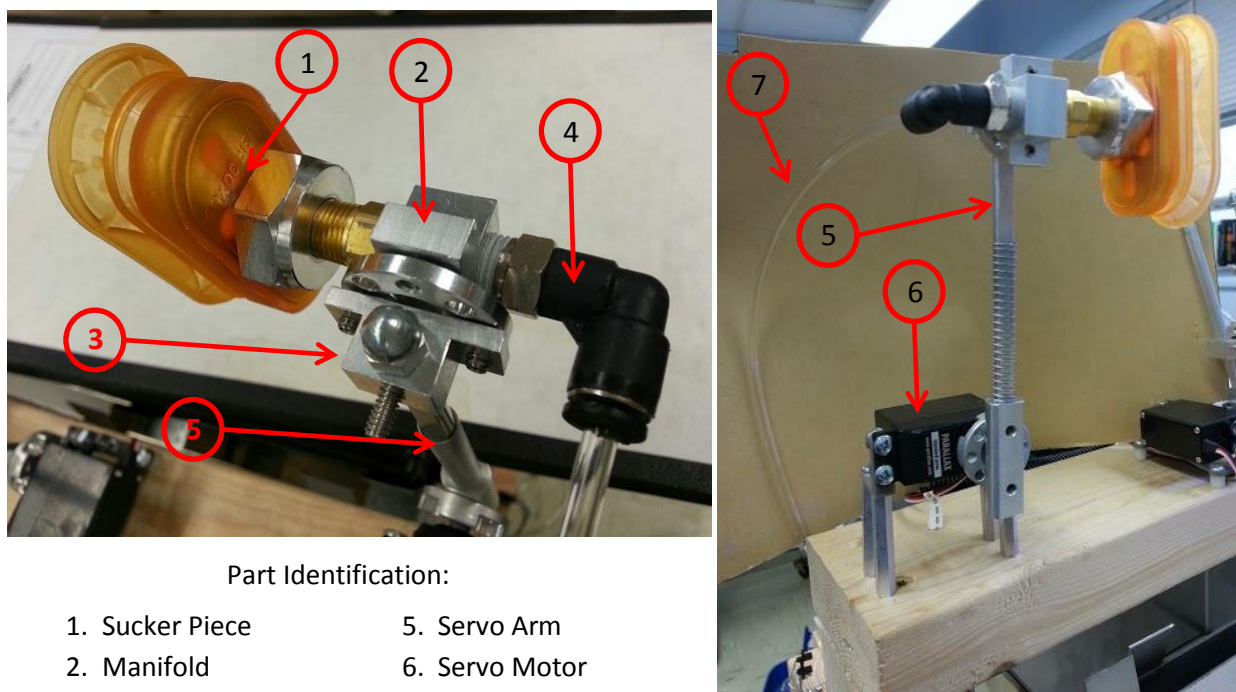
Overview of the Servo Arm Assembly for the Folder Holding System
